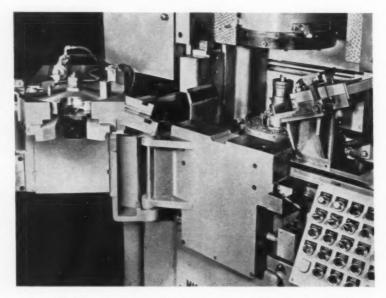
Interference of automating devices when changing tools on machine shown in Fig. 1 is avoided with pivot-mounted loading device
